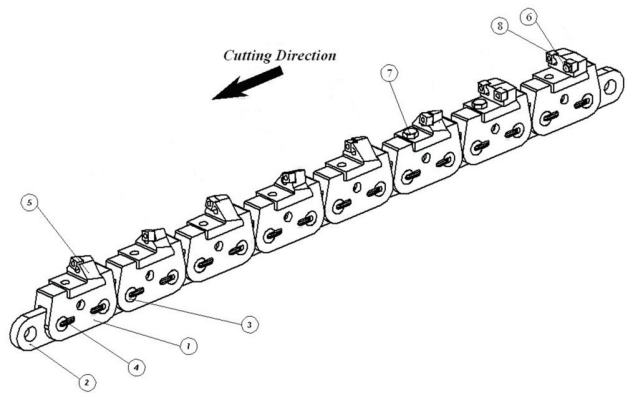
Chain body of the armed-chained cutting machine (1) chain body. (2) link. (3) pin. (4) joiner pin. (5) cutting edge kater. (6) M5x16 wrench bolt connecting cutting edge to kater. (7) M8x15 wrench bolt connecting kater to chain body. (8) Carbide cutting edge
